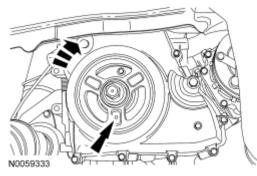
Locating Hole On Crankshaft Pulley And Turning Crankshaft Clockwise Courtesy of FORD MOTOR CO.
